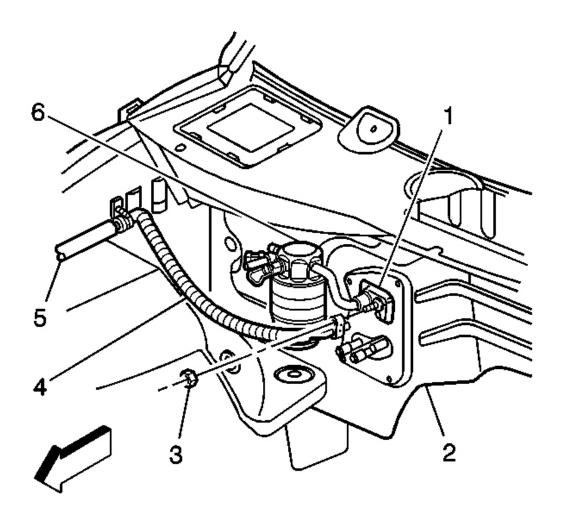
View Of HVAC Module Assembly Courtesy of GENERAL MOTORS CORP.
